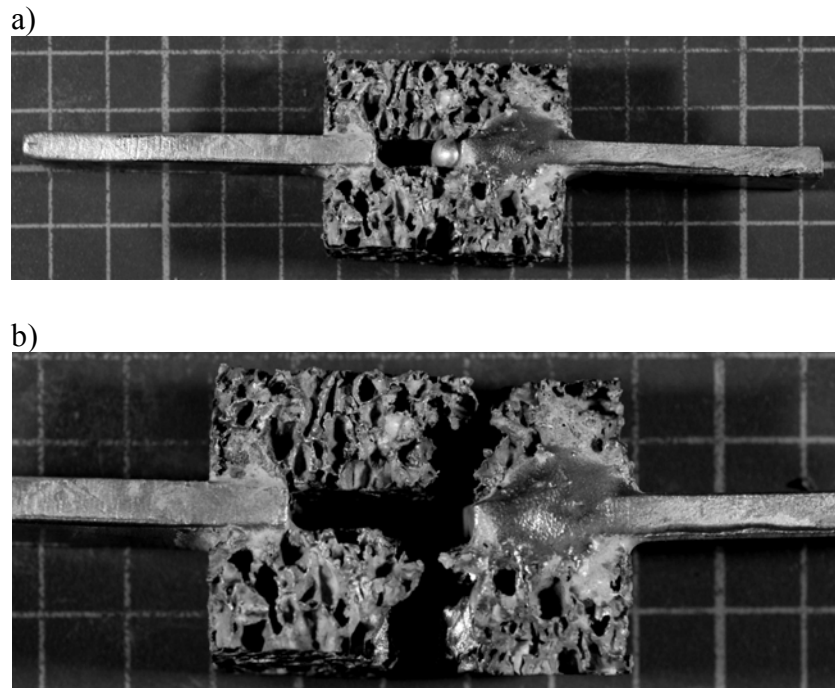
Specimen for shear testing by tensioning, AlSi - Al sheet metal lap joints a) specimen construction
